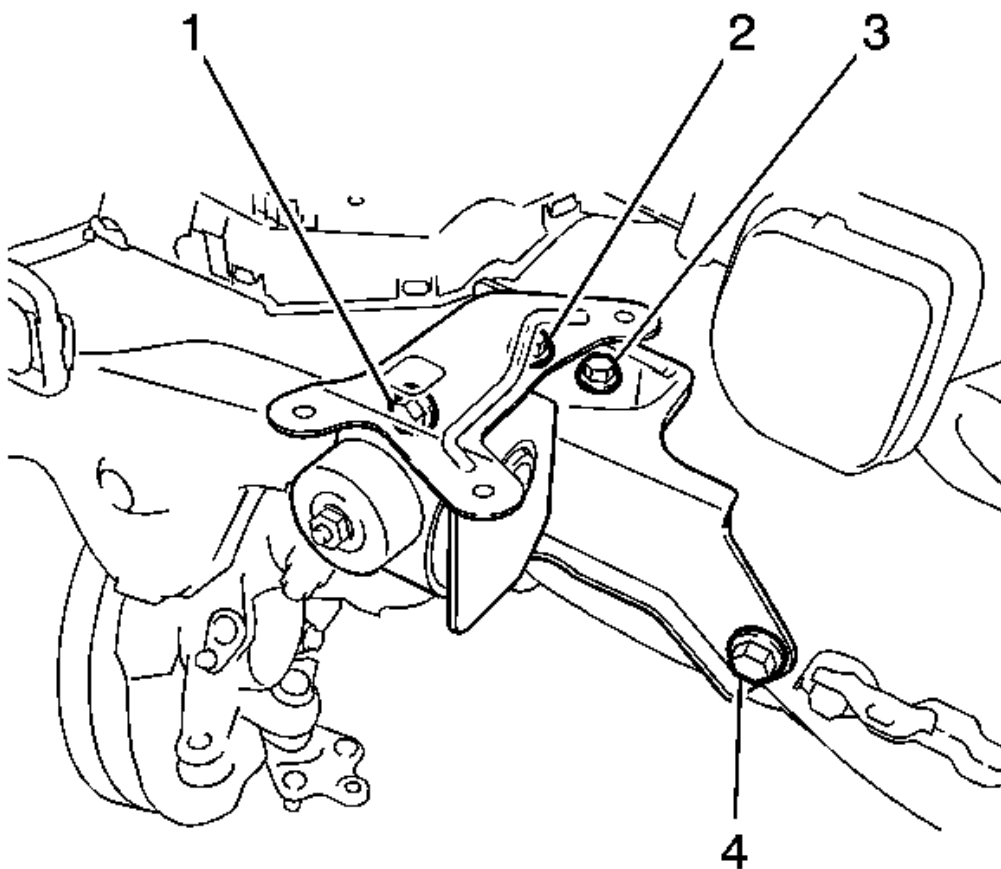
Identifying Left Engine Mounting Insulator & Bolts
